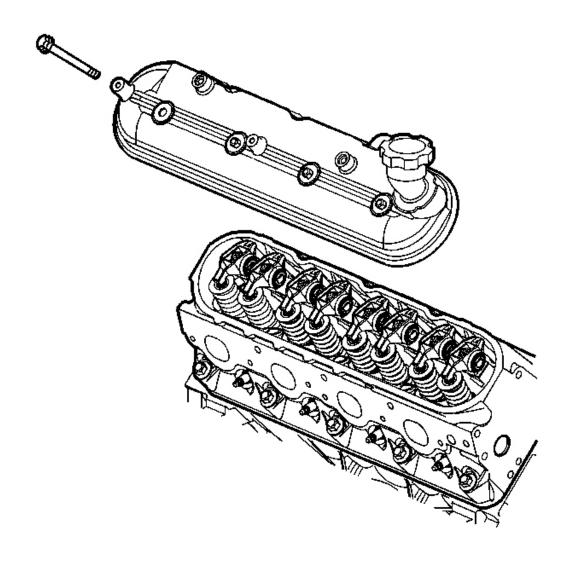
View Of Valve Rocker Arm Cover & Bolts (Right) Courtesy of GENERAL MOTORS CORP.
